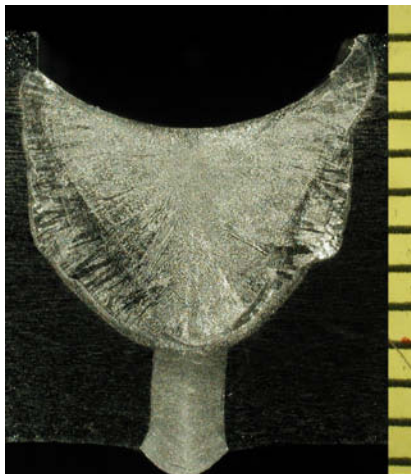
The groove geometry used in the further experiments. At first, the root pass was welded using keyhole hybrid welding and after that, one filling pass was welded using conduction limited mode. Varied gap widths were between 6,7 mm and 10,8 mm.
